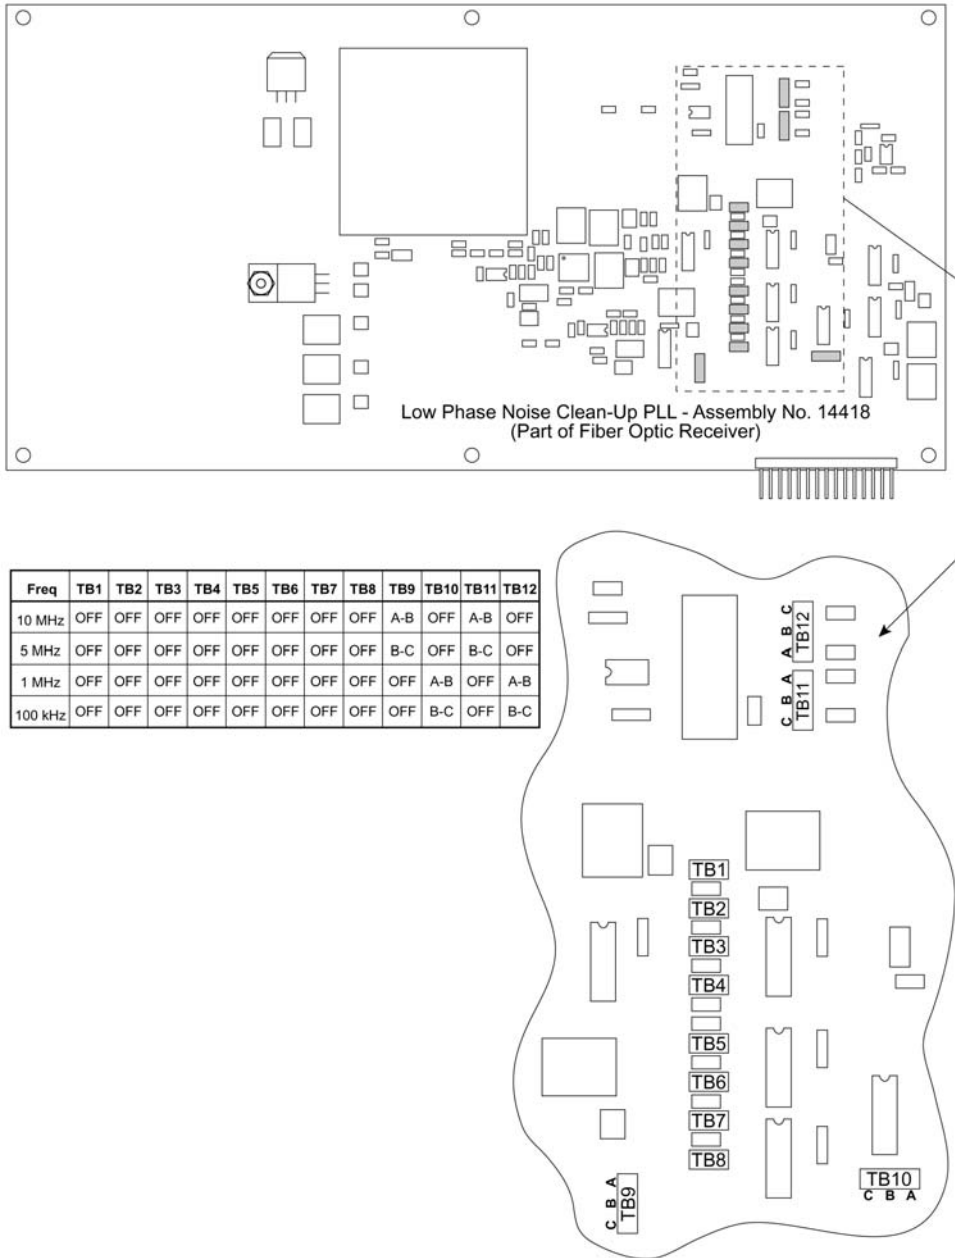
SETTING JUMPERS ON 6531A RECEIVER ASSEMBLY
